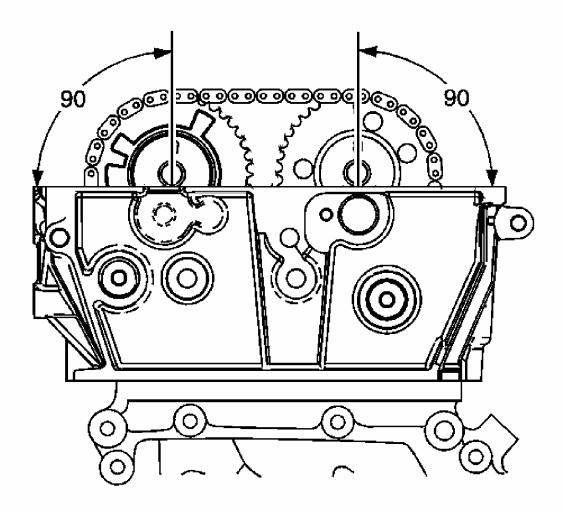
Aligning Right Intake & Exhaust Camshaft Sprocket Courtesy of GENERAL MOTORS CORP.
